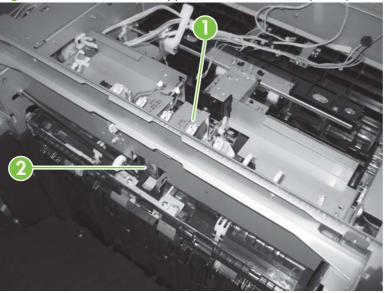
Remove the upper crossmember unit (5 of 5)
